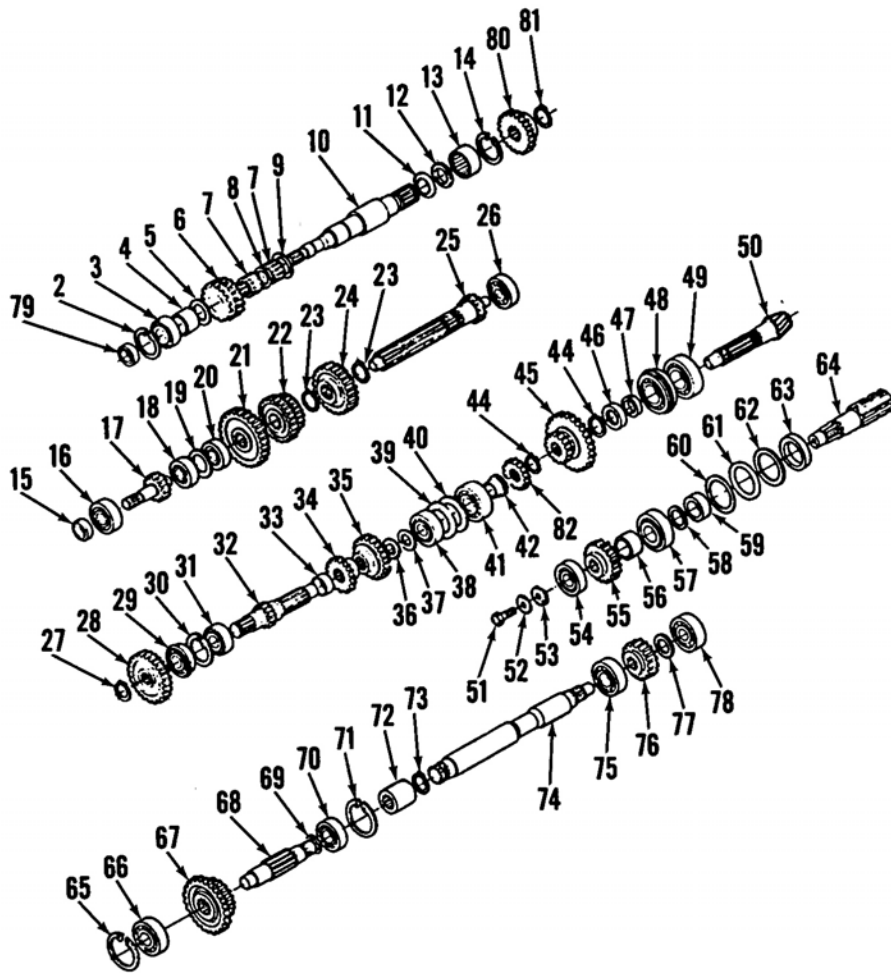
Exploded view of transmission gears, shafts and other components showing relative installed position used on Model B5100D. For identification of parts, refer to legend in Fig. 75 except for the following front-wheel drive components.
